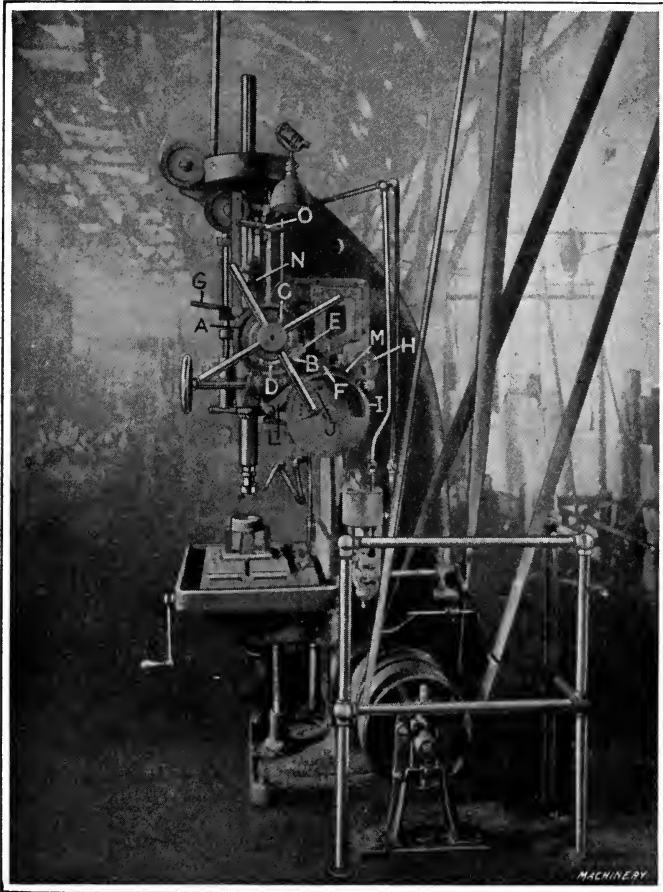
Close View of Mechanism employed to Disengage Feed but hold Spindle Vertically while completing Facing Operations
